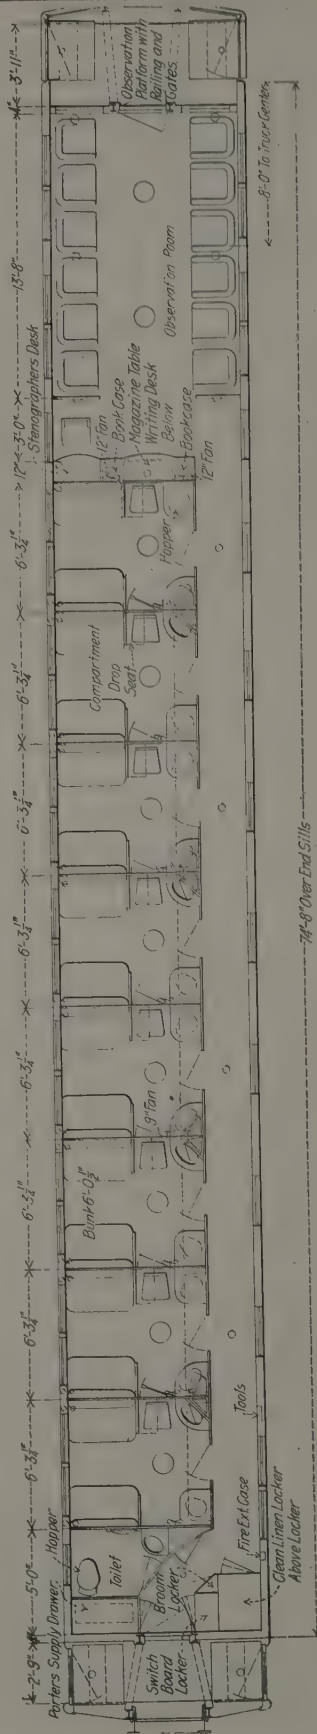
Floor Plan of Compartment Sleeper and Ladies' Observation Room. Builder, The Pullman Company.
